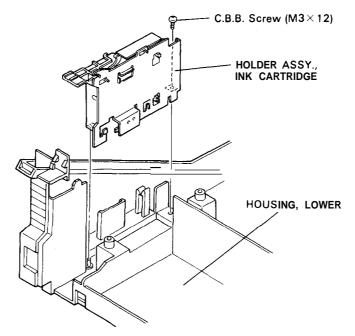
HOLDER ASSY., INK CARTRIDGE Removal
